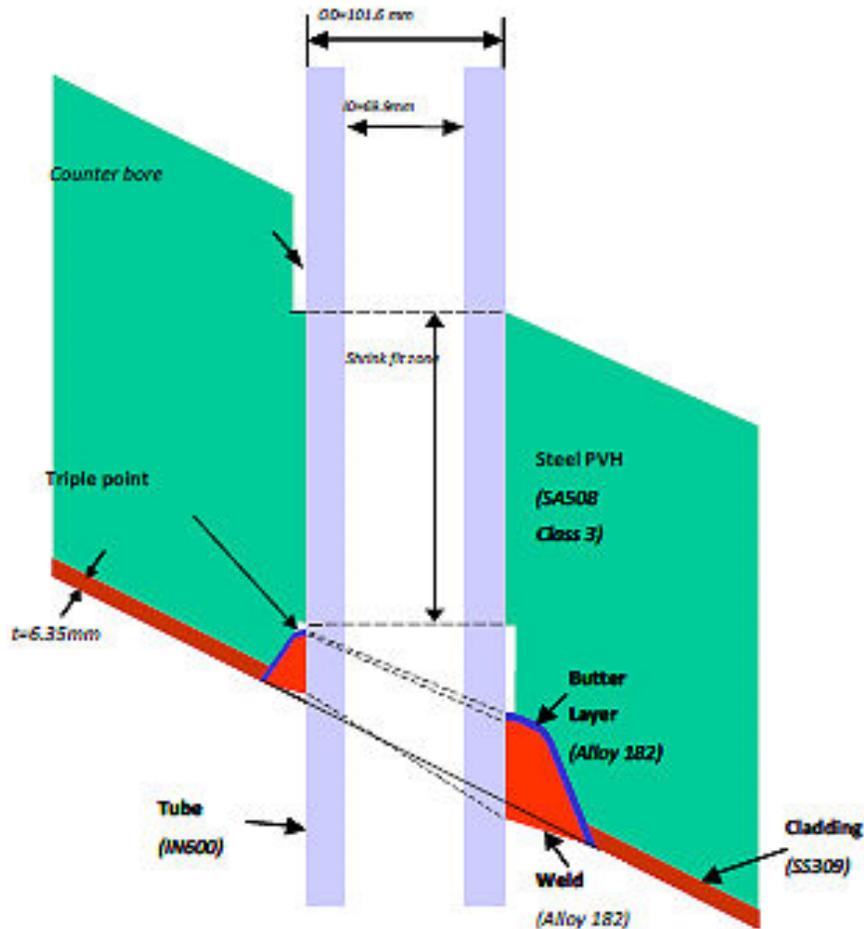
Typical CRDM reactor vessel head J-groove weld
